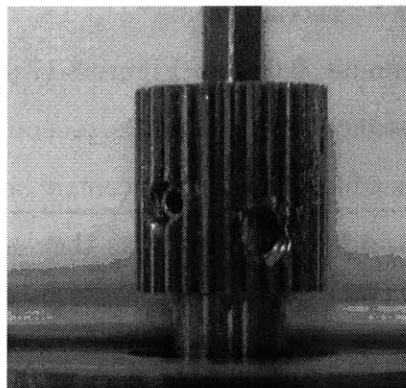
Motor pinion showing compromised gear quality as a result of machining.
